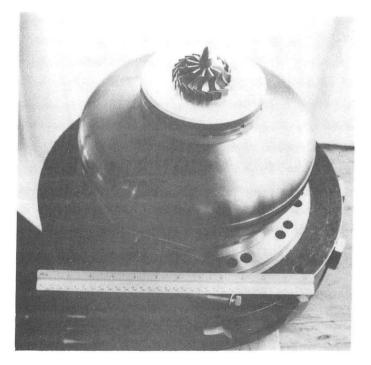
(CBB 831-479). A CHL turbine cartridge assembly - scale in inches. Photo courtesy FNAL.
